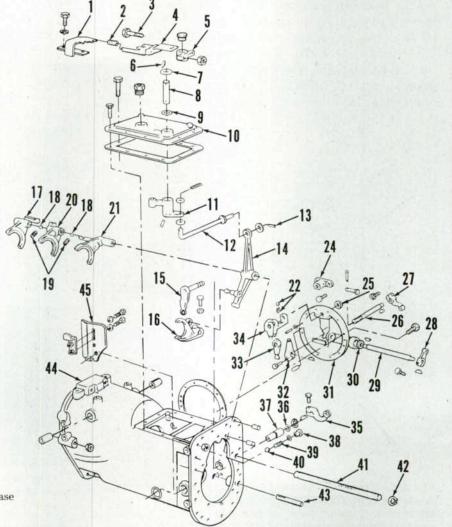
Exploded view showing transmission case, gearshaft and parking brake components.
